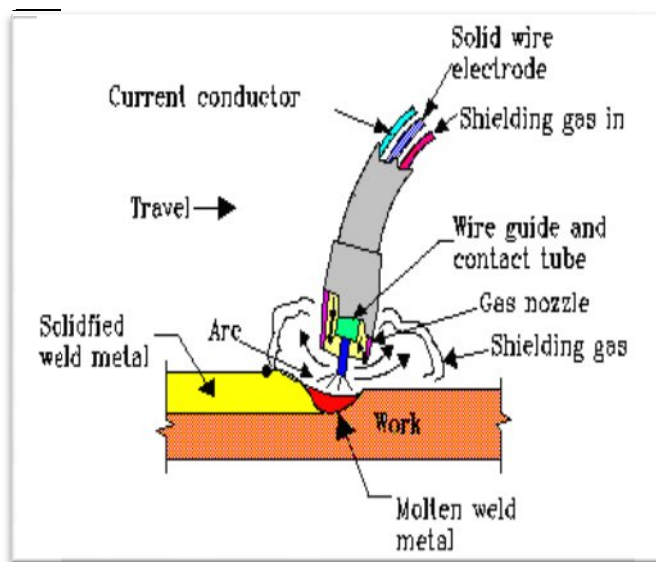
Schematic of Metal Inert Gas (MIG) Welding
